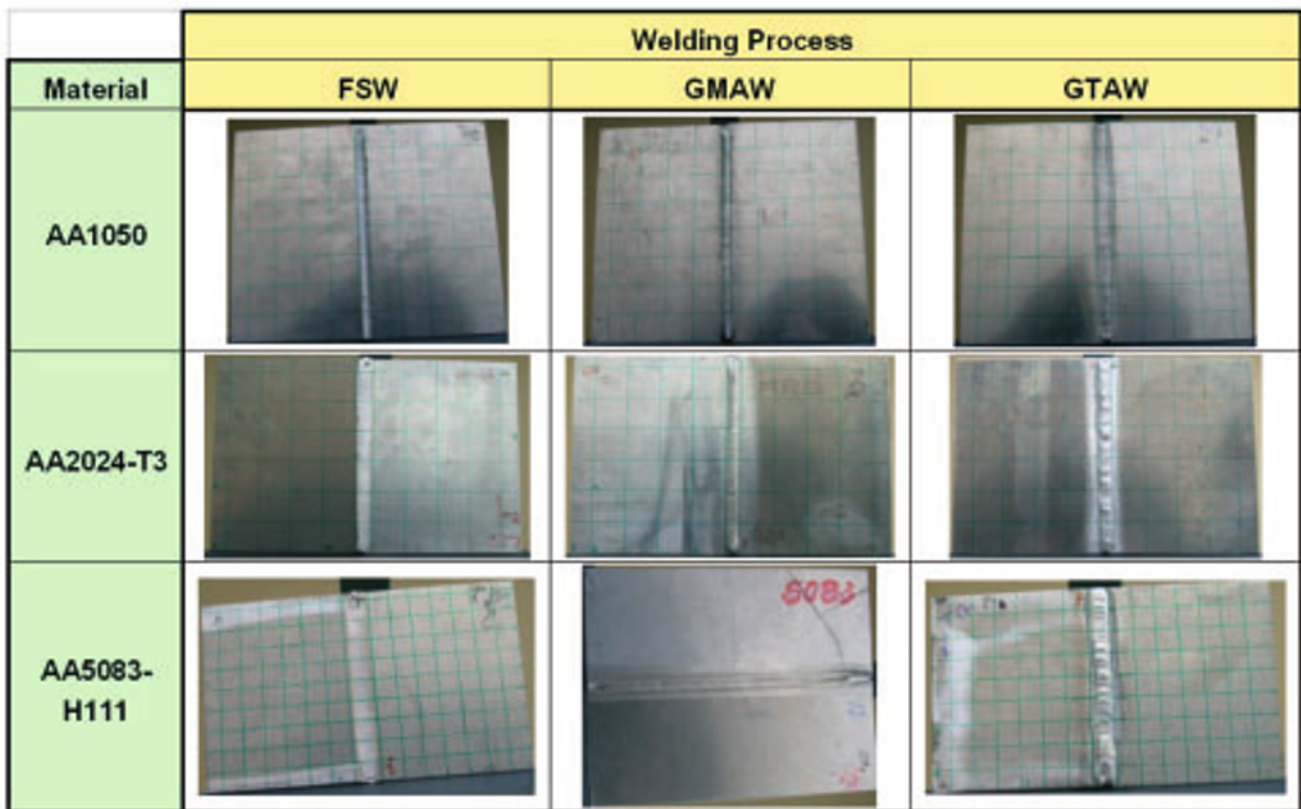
Samples of the top surface finishing of the welded plates
